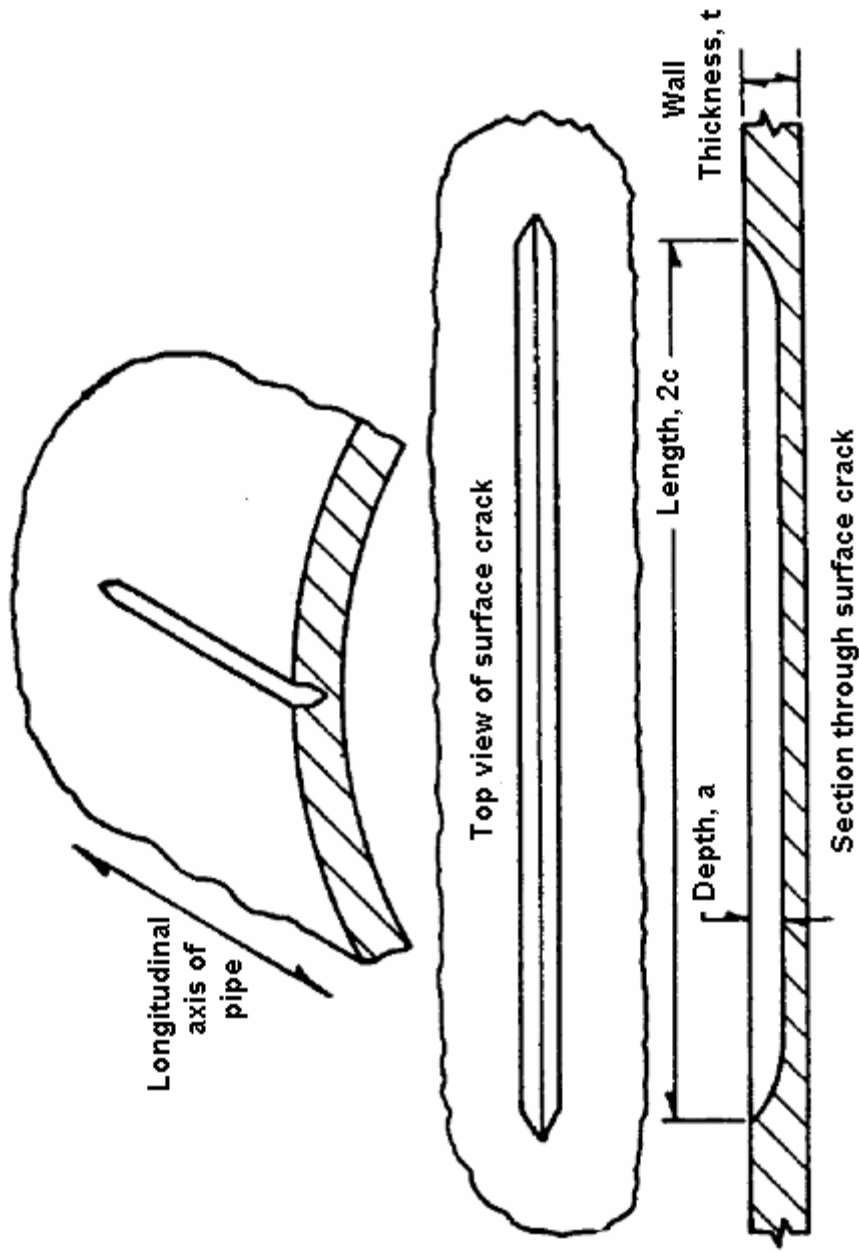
Schematic view of an exterior, part-through wall axial crack in a cylinder.
